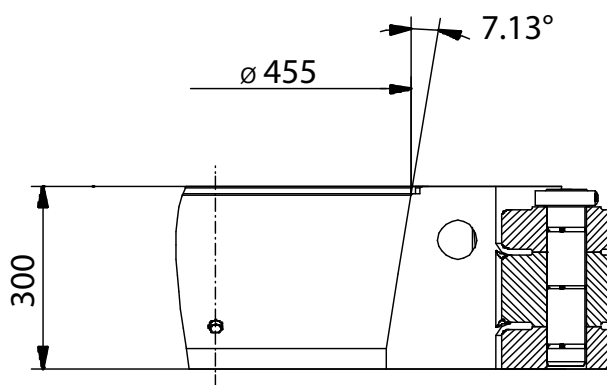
Principle drawing of a HCS 200 - 13.3/8" with 3" API-Taper main dimensions
